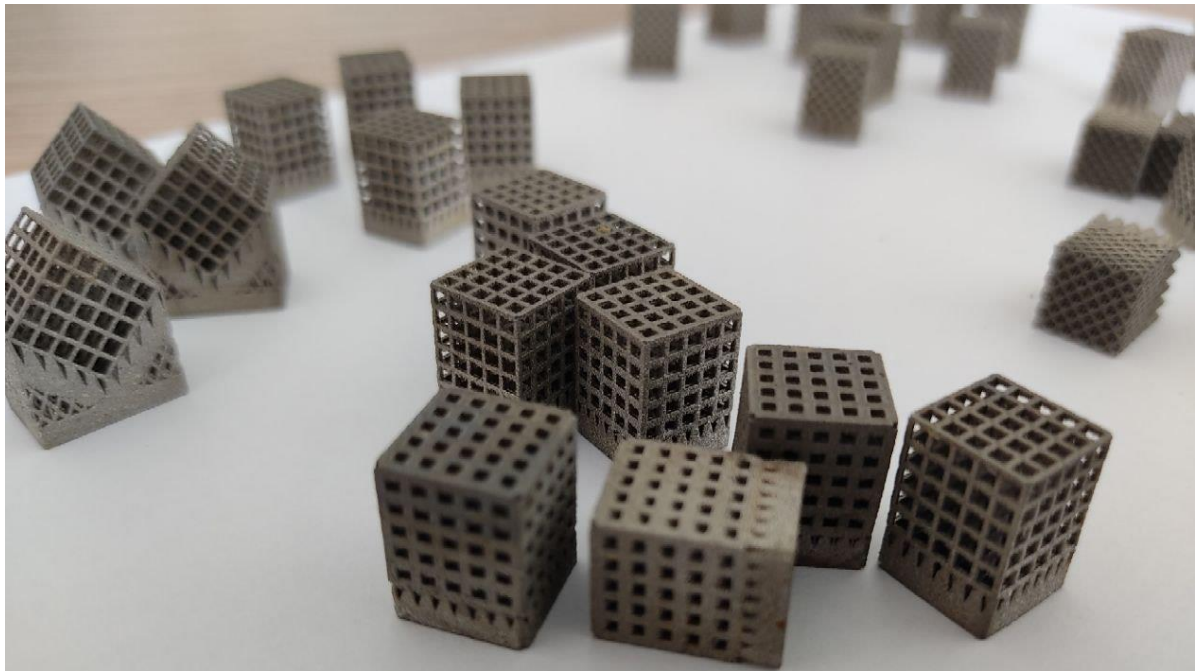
Lattice structures manufactured using additive manufacturing Selective Laser Melting (SLM) machine
